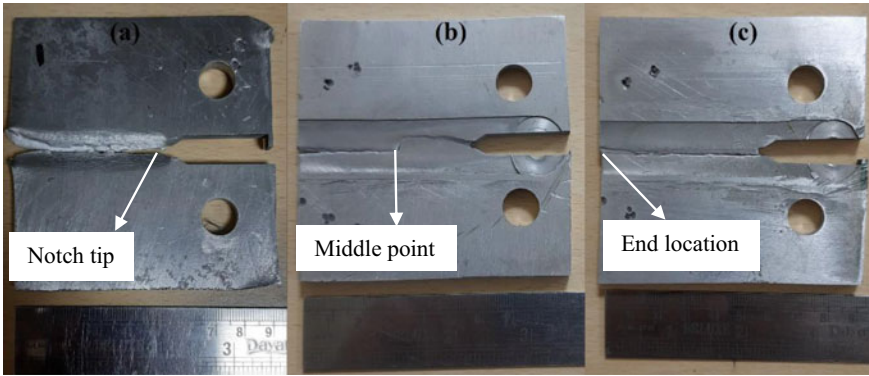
Fractured CT specimen of a base metal, b welded specimen at 1100 rpm, c welded specimen at 1500 rpm
